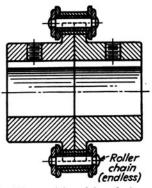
The positive drive design of Diamond Chain & Manufacturing Company consists of two sprockets connected by a length of roller chain. Clearance between sprockets and chain side plates allows freedom to compensate for misalignment in all directions.
